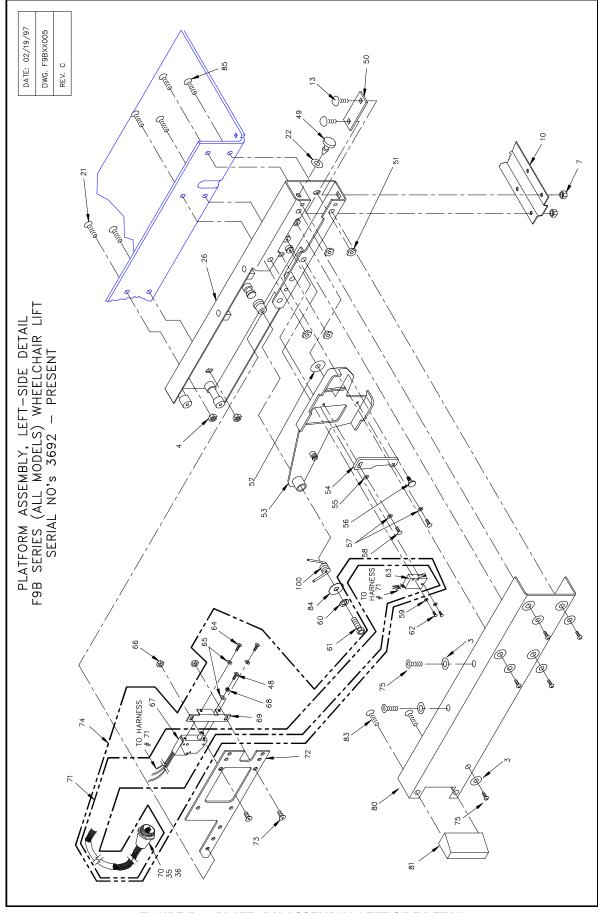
PLATFORM ASSEMBLY, LEFT SIDE DETAIL
